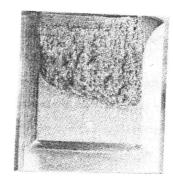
Fatigue crack of 25% side grooved CT specimen.
